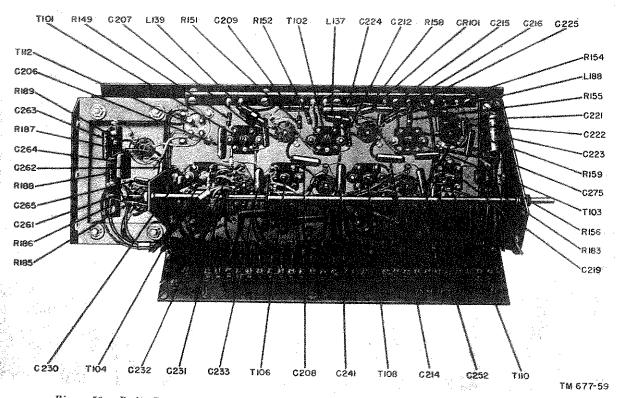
Radio Receiver R-395/PRD-1, if. and af chassis, bottom view (upper-half components).
